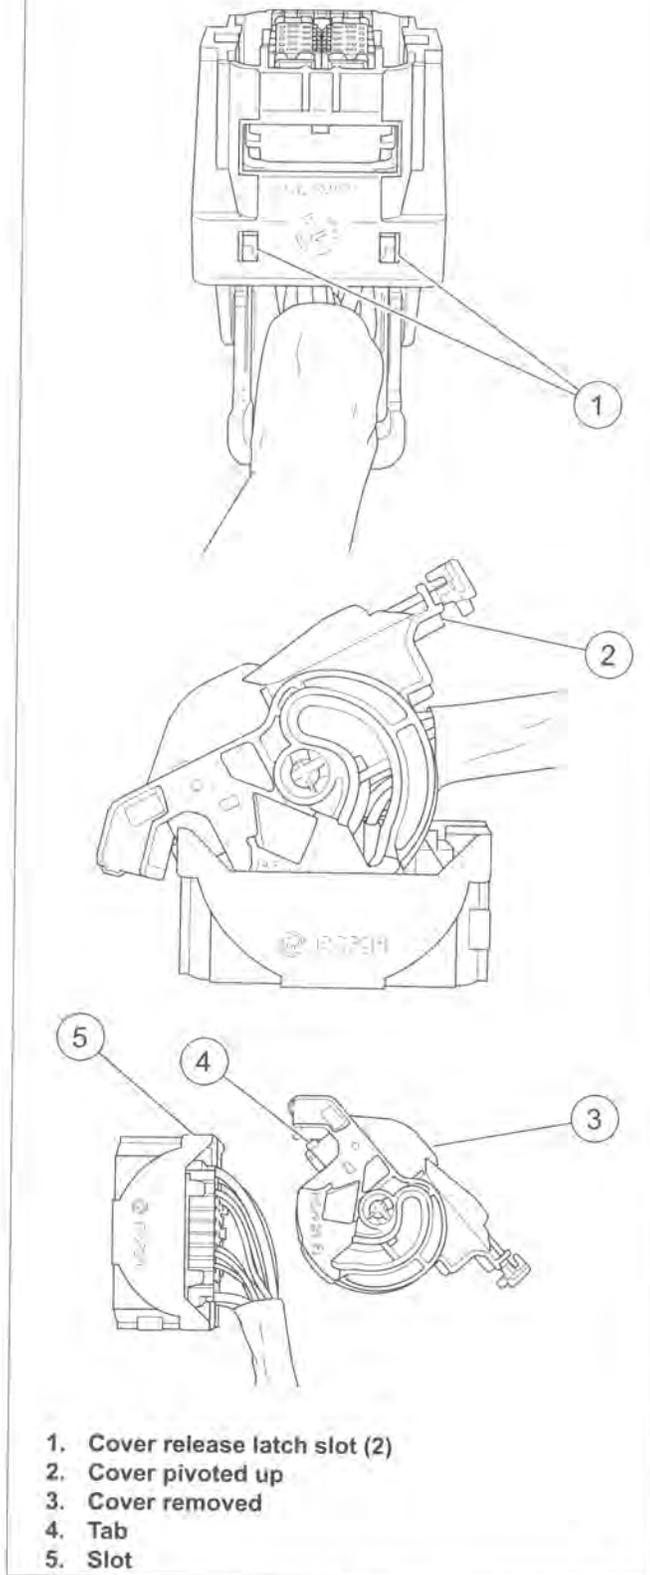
Removing Bosch BTC Sealed Connector Cover
